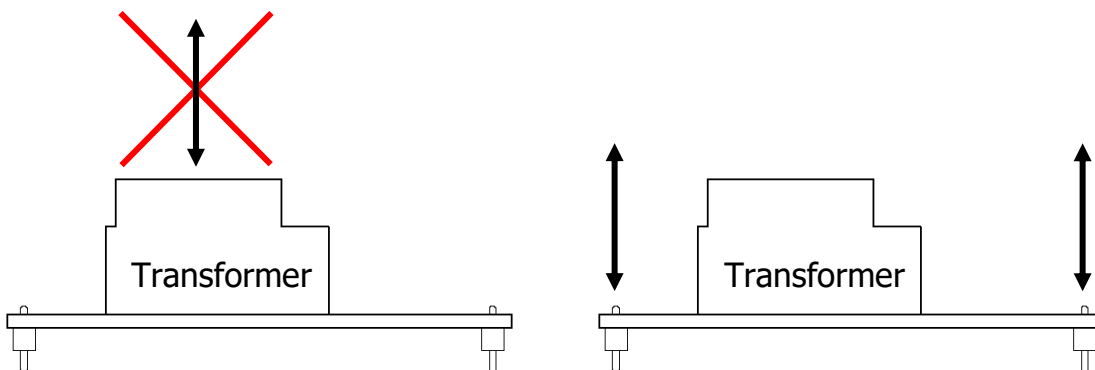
Not recommended (left) and recommended (right) ways of handling Power Integrations gate driver cores during assembly (body plan of a driver)
